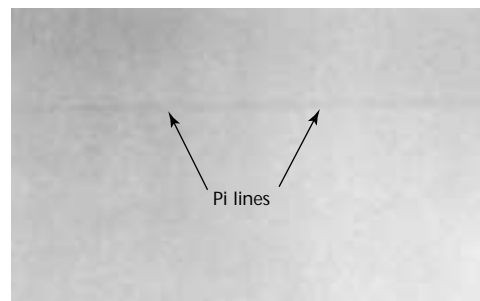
Pressure marks caused by foreign matter on rollers or improper roller clearance.
